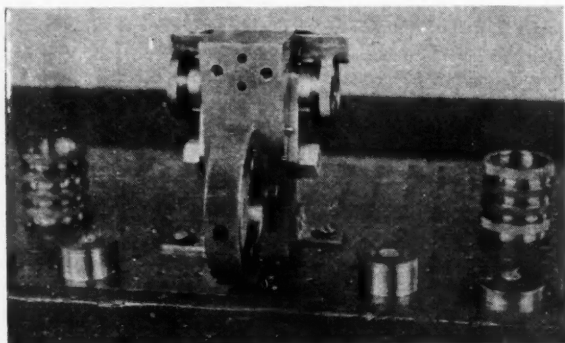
Another inspection layout developed by motion study technique. Two pieces involving stepped diameters and an external thread are checked simultaneously
